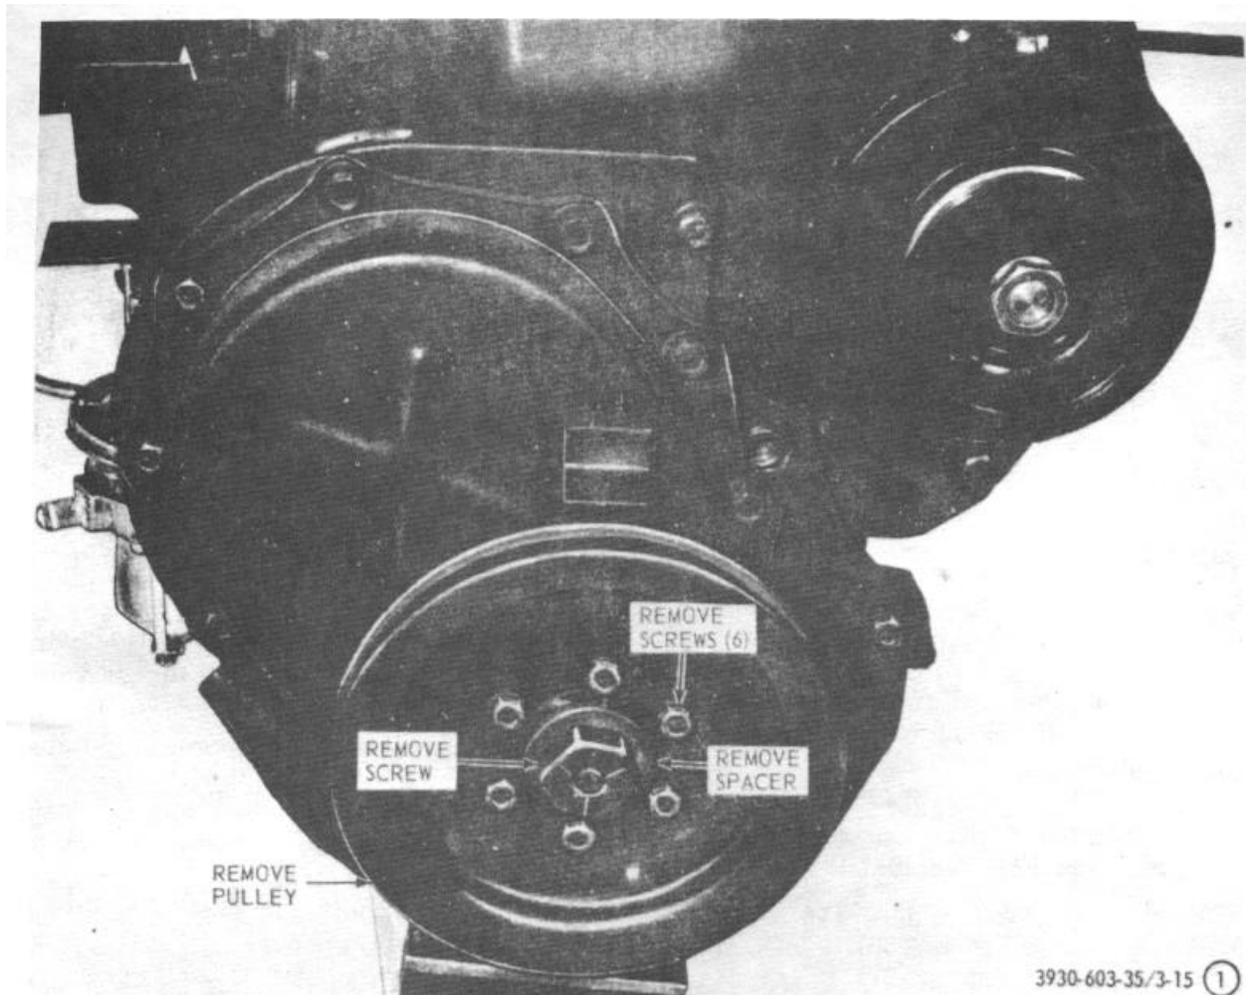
(1). Crankshaft pulley and front cover, removal and installation.
